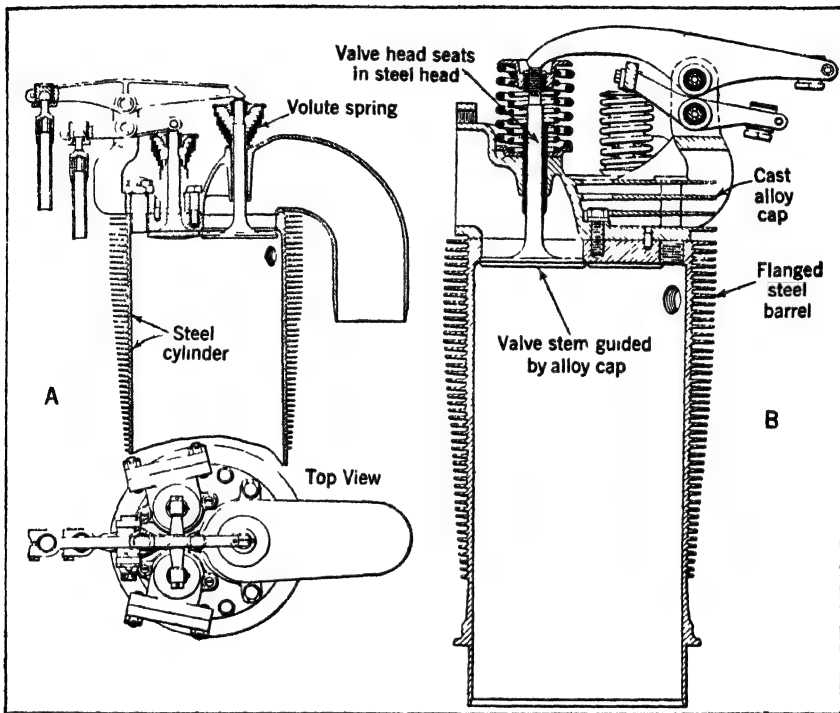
View at A Shows an All-Steel Five and One-Half by Six and One-Half Inch Air-Cooled Engine Cylinder Having Bolted on Valve Cages. At B a Sectional Elevation of a Steel Cylinder with Aluminum Cap Pieces, Carrying Valve Stem Guide and Rocker Arm Assembly is Shown.
